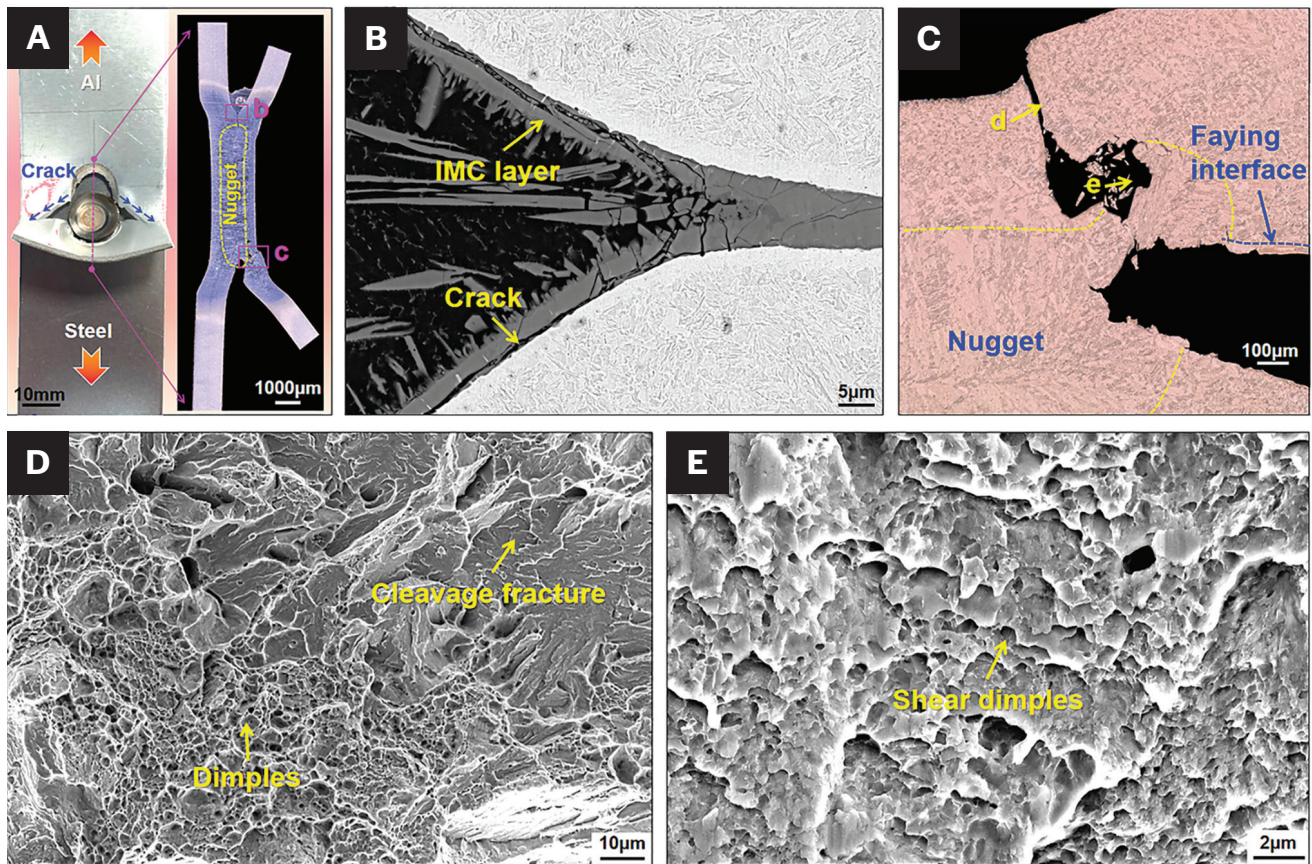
Failure modes of AE-RSW joint: A — Overall fracture morphology; B and C — enlarged view; D and E — fracture morphology at different positions marked in C.
